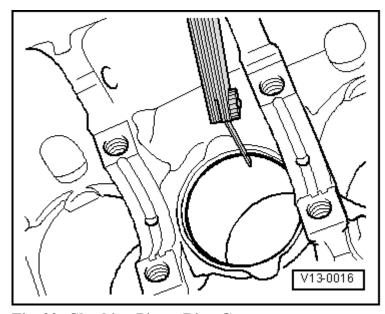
Checking Piston Ring Gap Courtesy of AUDI OF AMERICA, LLC
